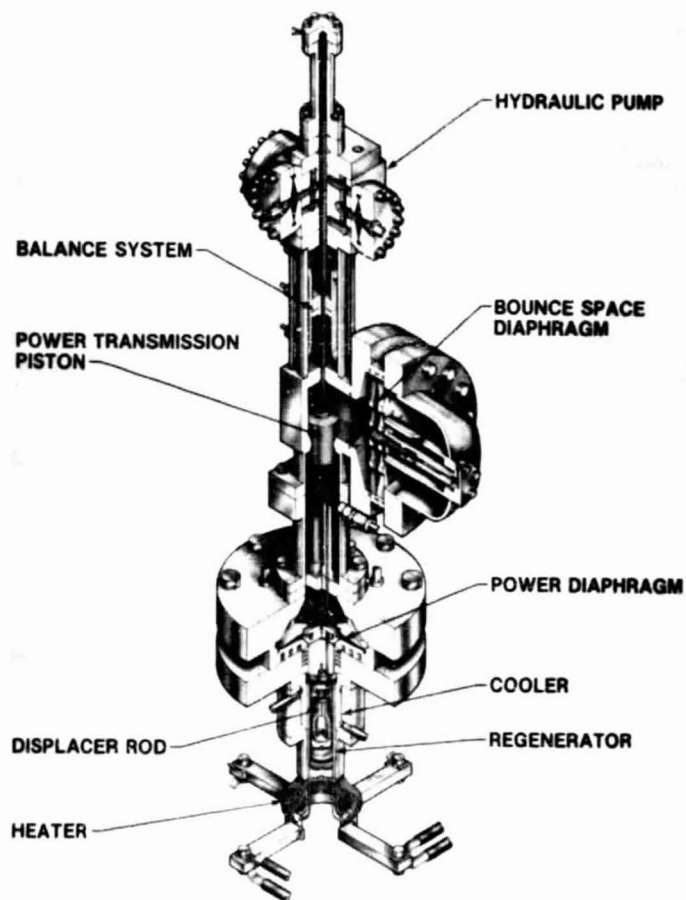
Cutaway view of the RE-1000 Free-Piston Stirling Engine with hydraulic load.
